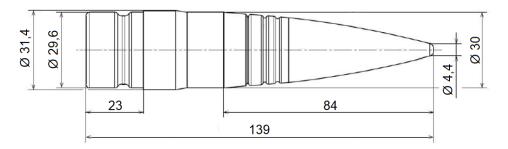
30mm projectile, drawing Puc. 1 – Снаряд 30mm, рисунок Слика 1 – Пројектил 30 mm, цртеж
